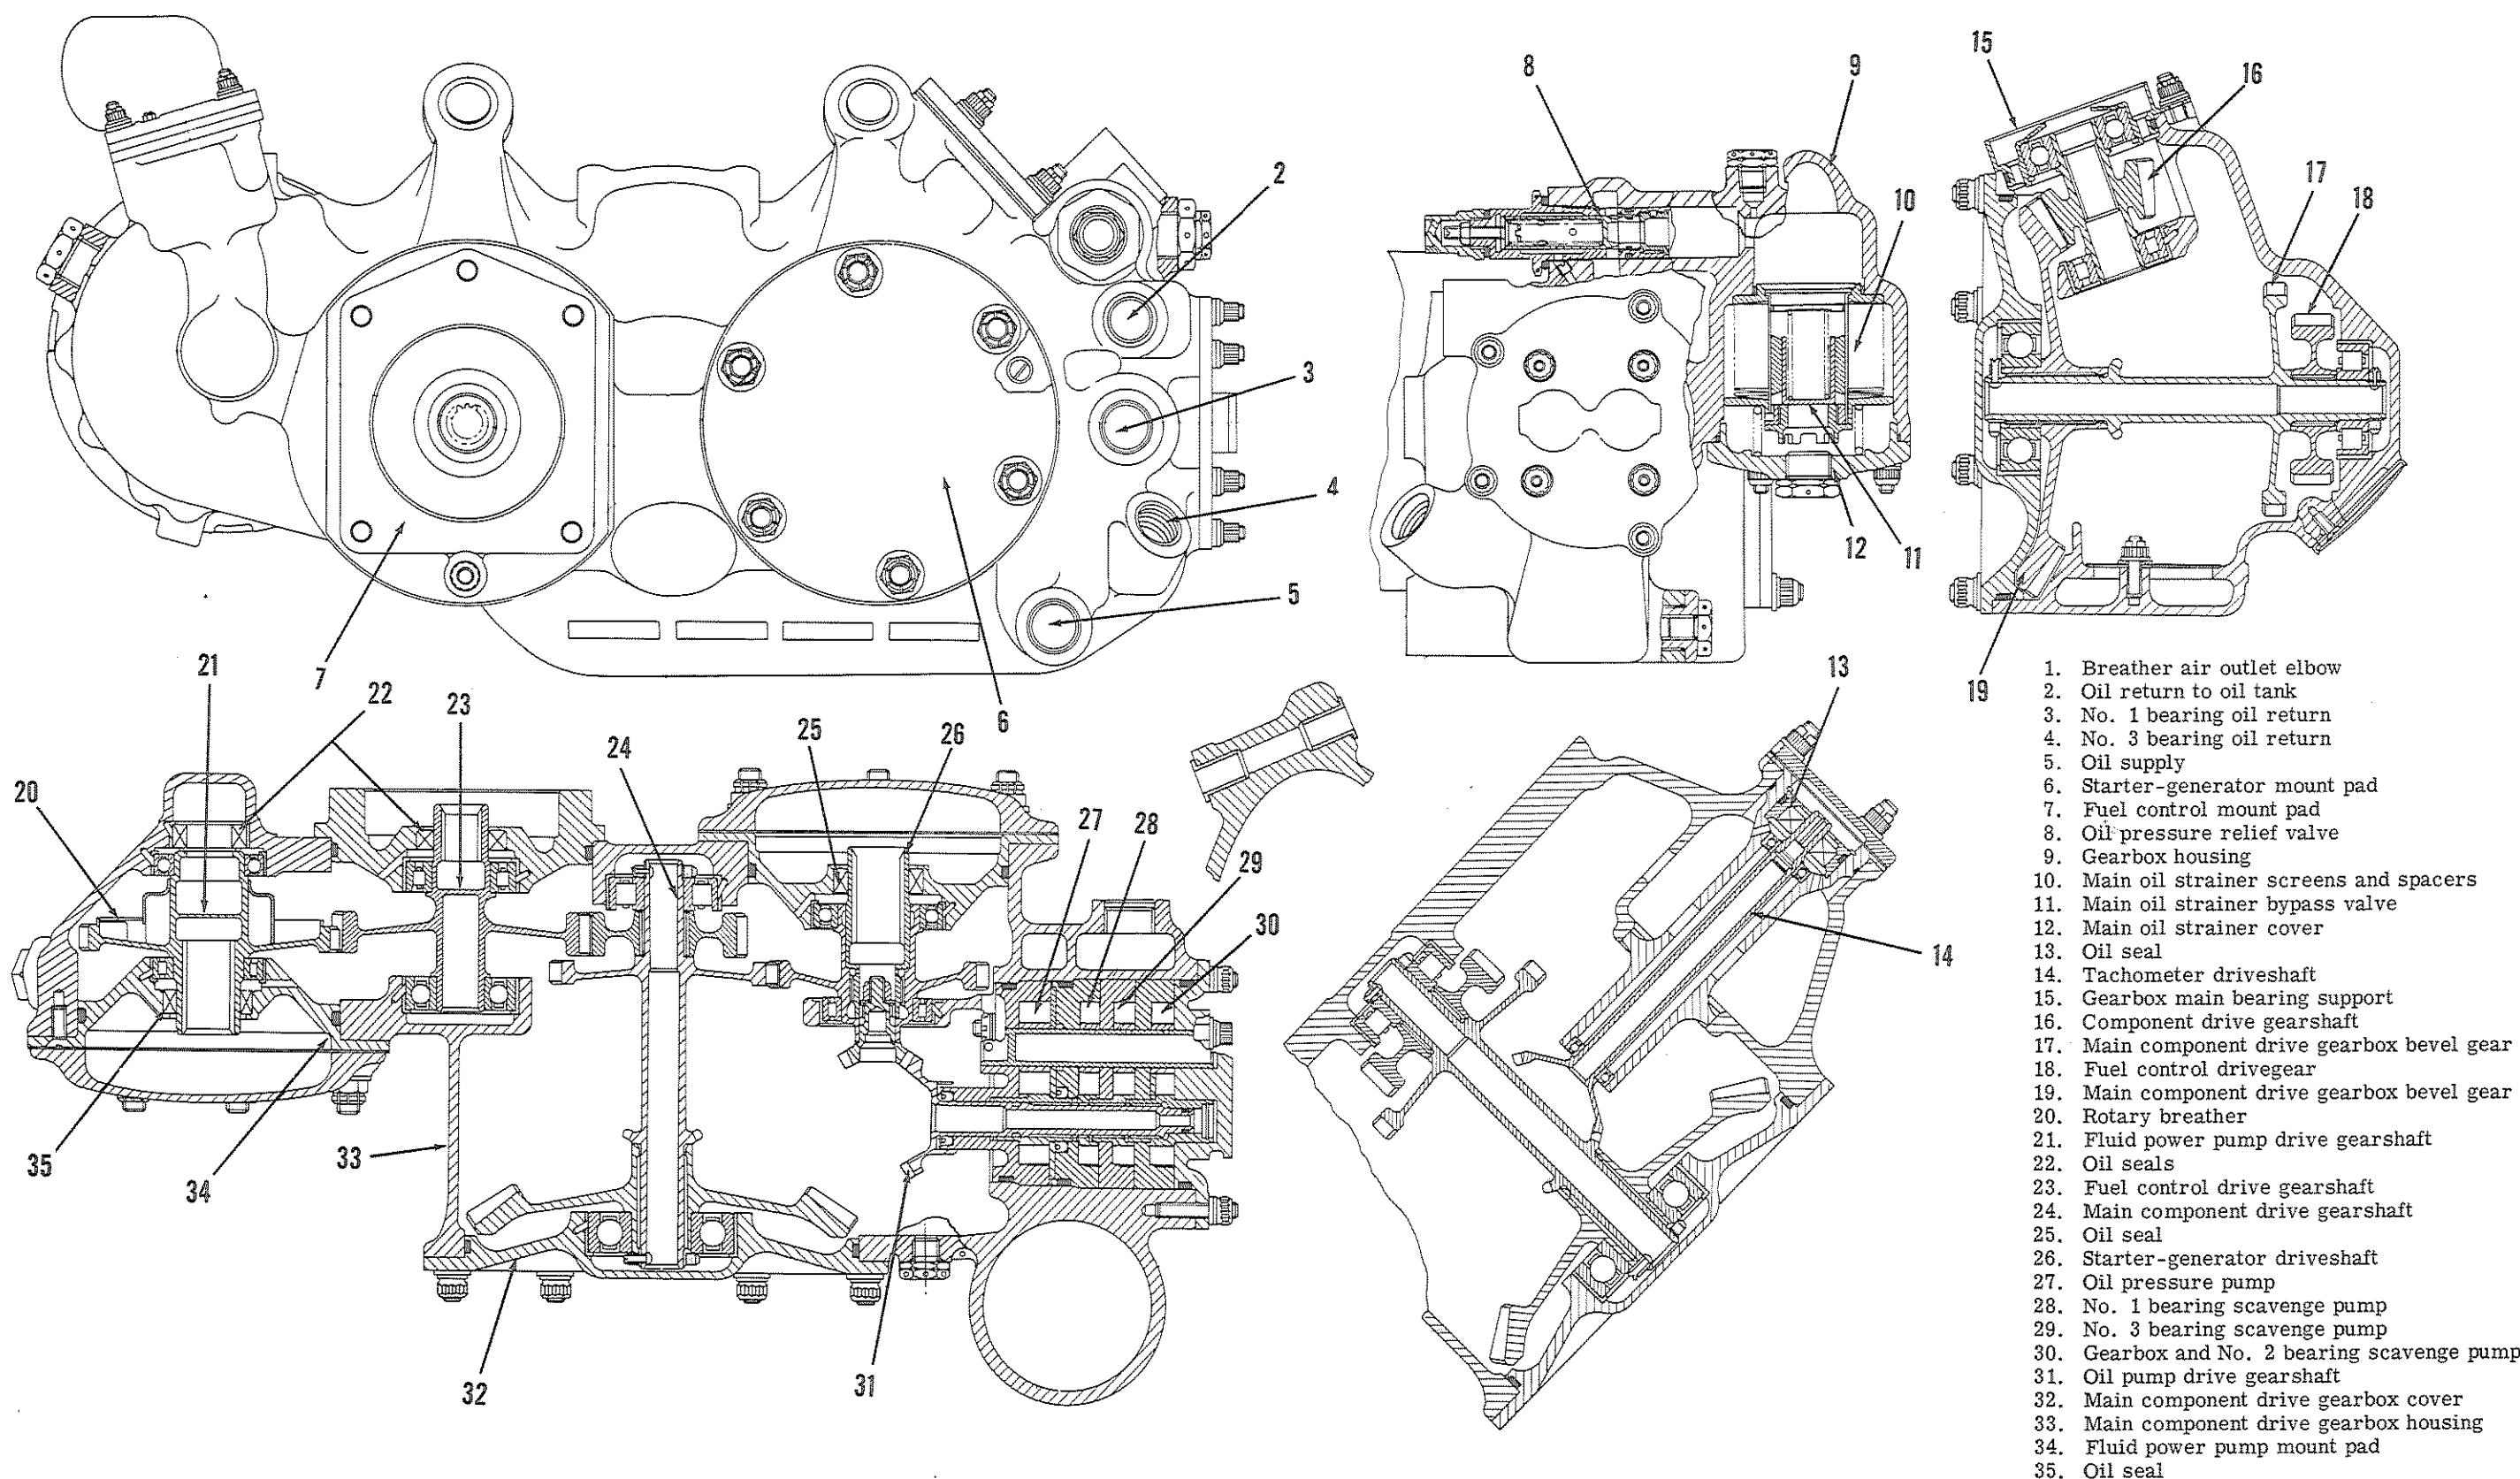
Cross-Sectional View of Component Drive Gearbox (JT12A-6A[N] and JT12A-8[N])
